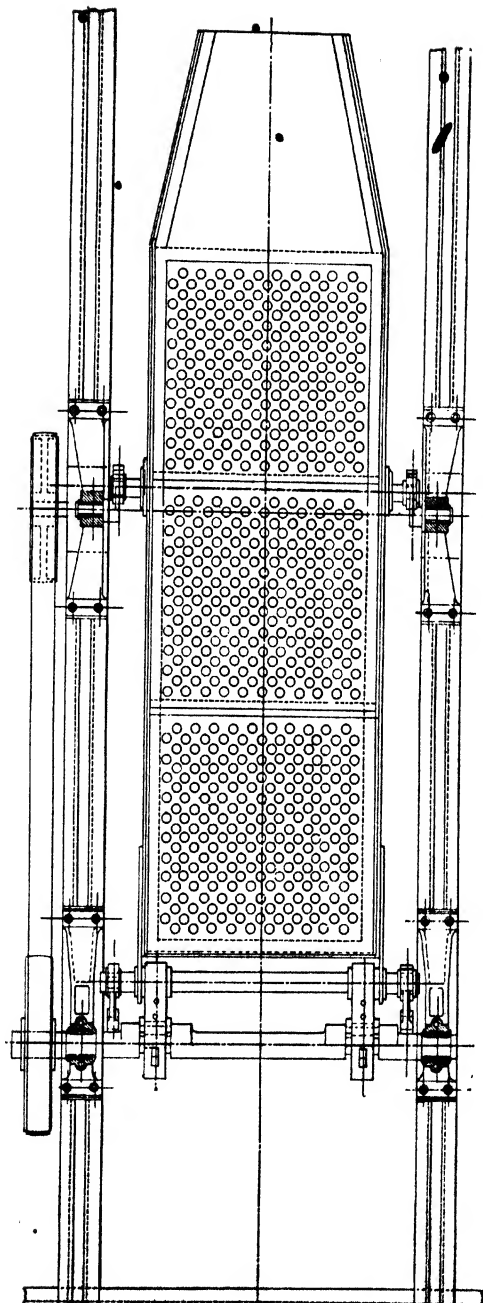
Elevation and plan of Durnford and Wormald's screen.
